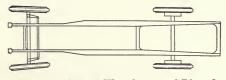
Front Wheels out of Line due to Wear or Improper Adjustment.
